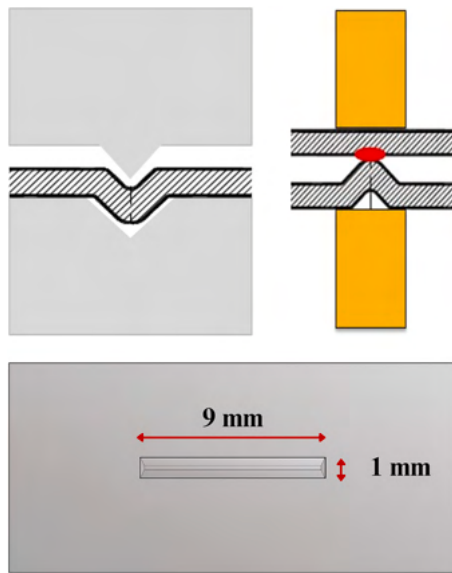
Scheme of the geometry of welded plates and process steps.
